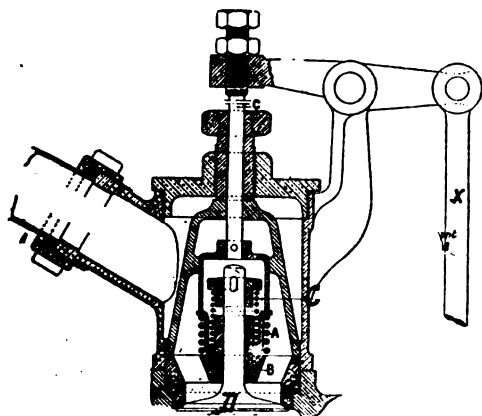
Section of Inlet Valve 10-h.p. Renault Car.
